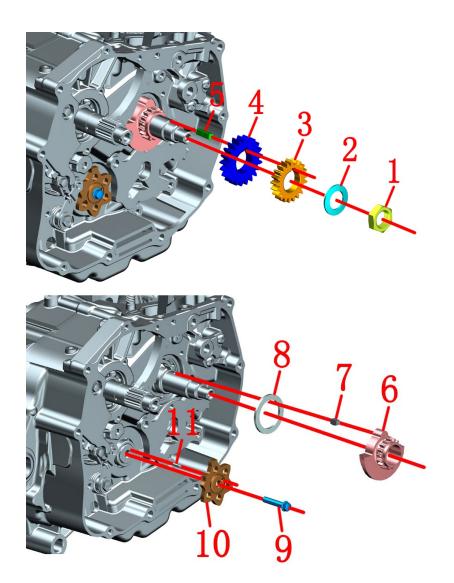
DISASSEMBLY		Preparation before the box is split 2	CHK	40)
